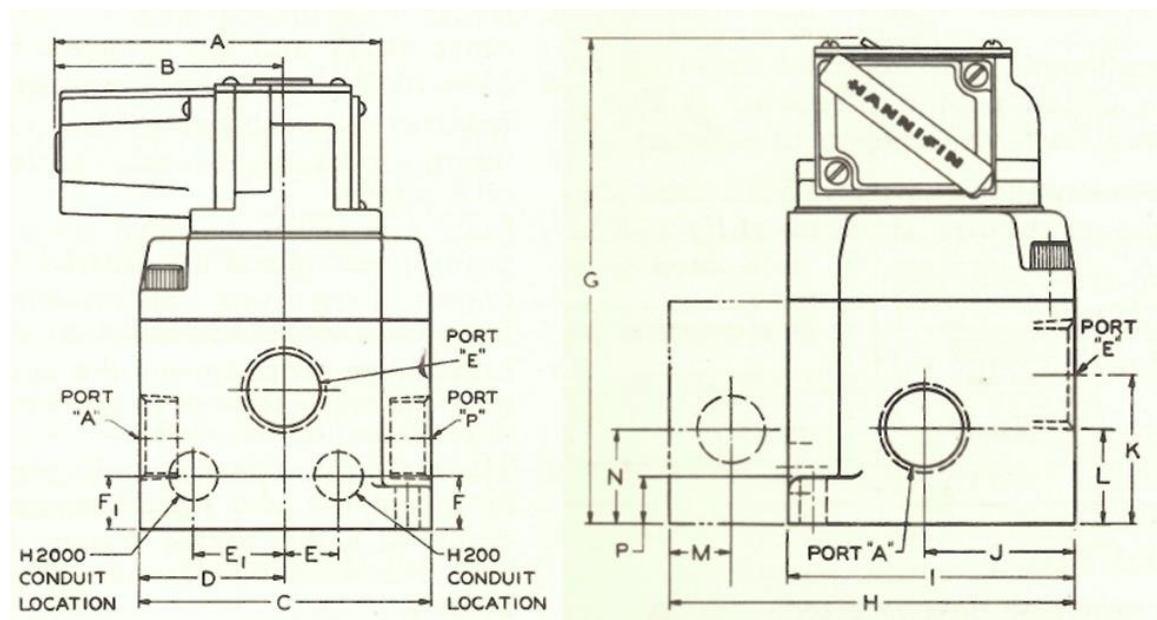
Front and Side Views (Respectively) of Solenoid Valve Drawings
